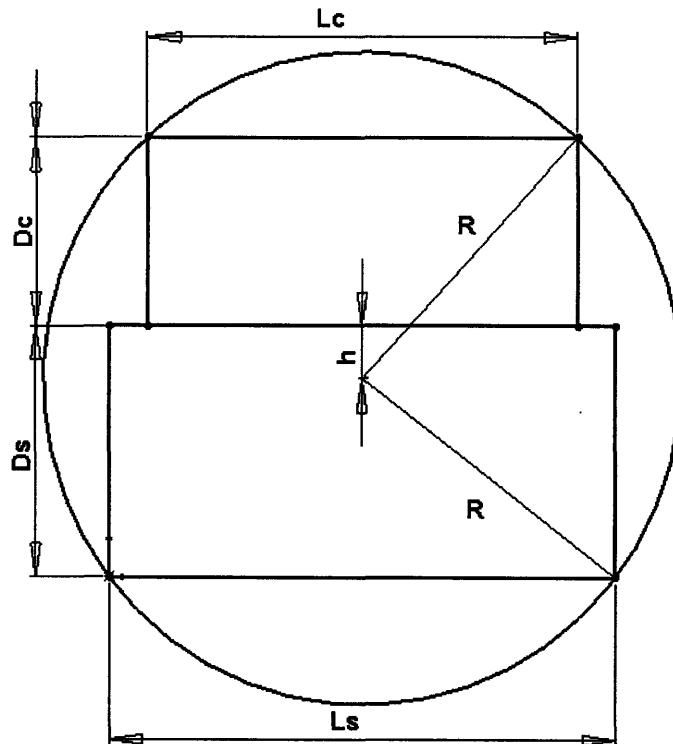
Diagram of relevant dimensions to calculate housing radius.
